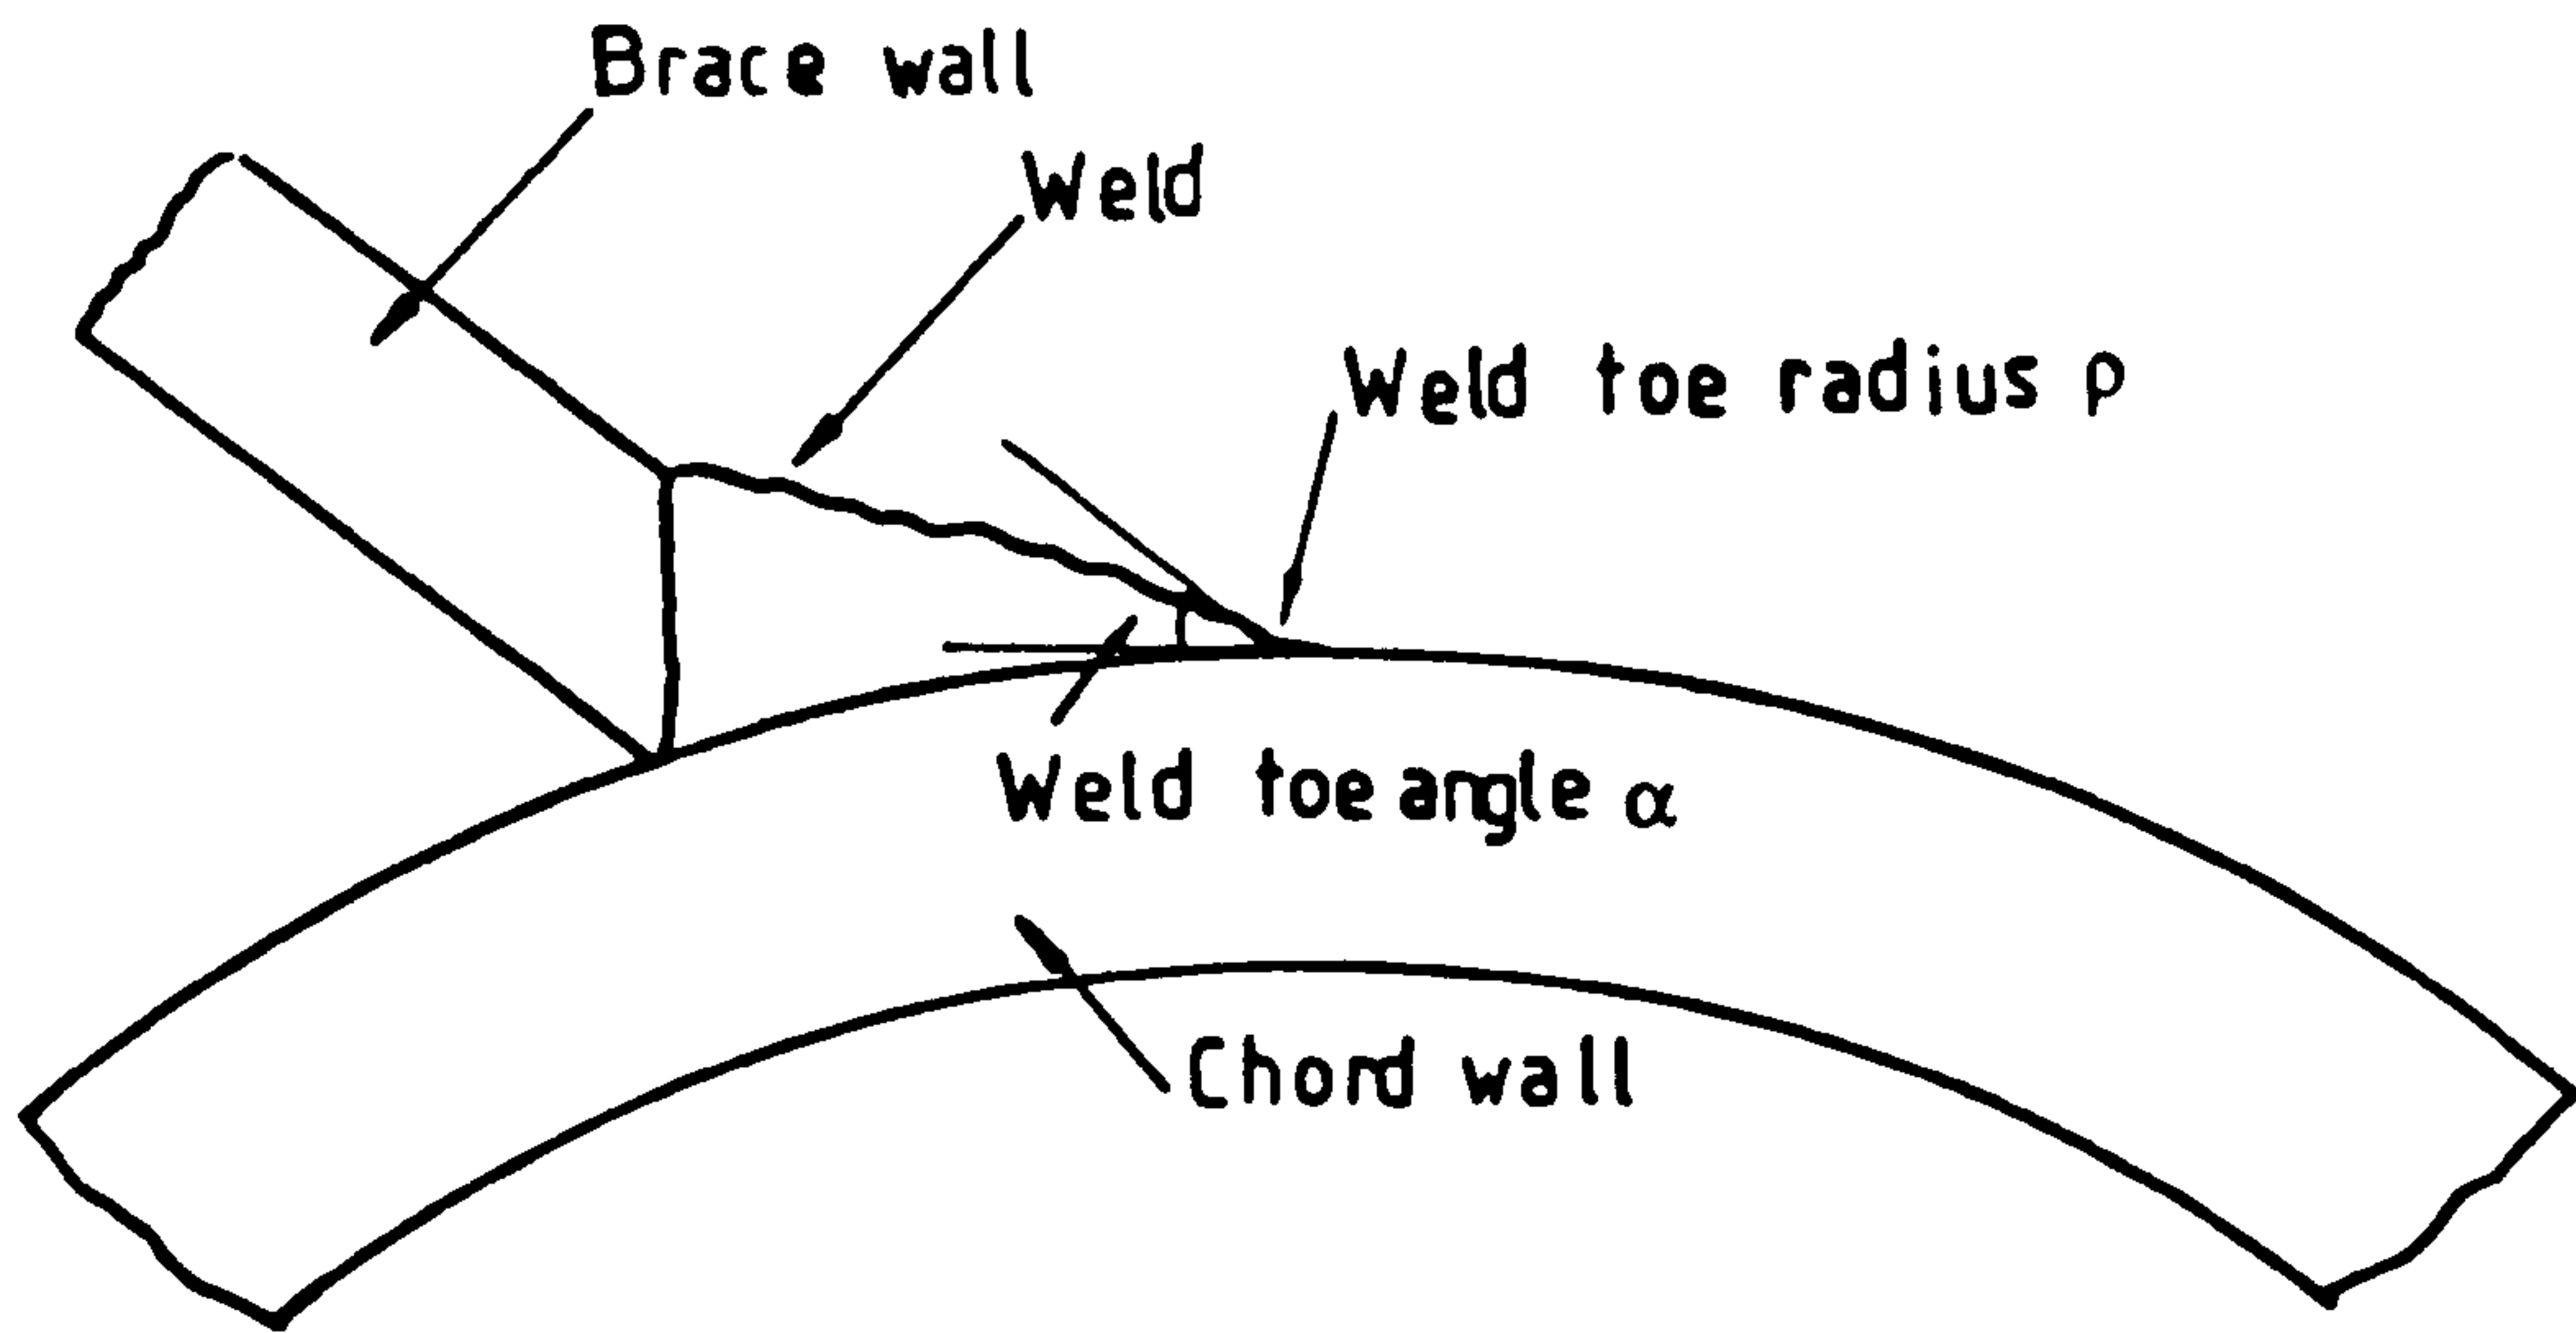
Schematic of weld profile showing weld toe angle α and weld toe radius ρ
